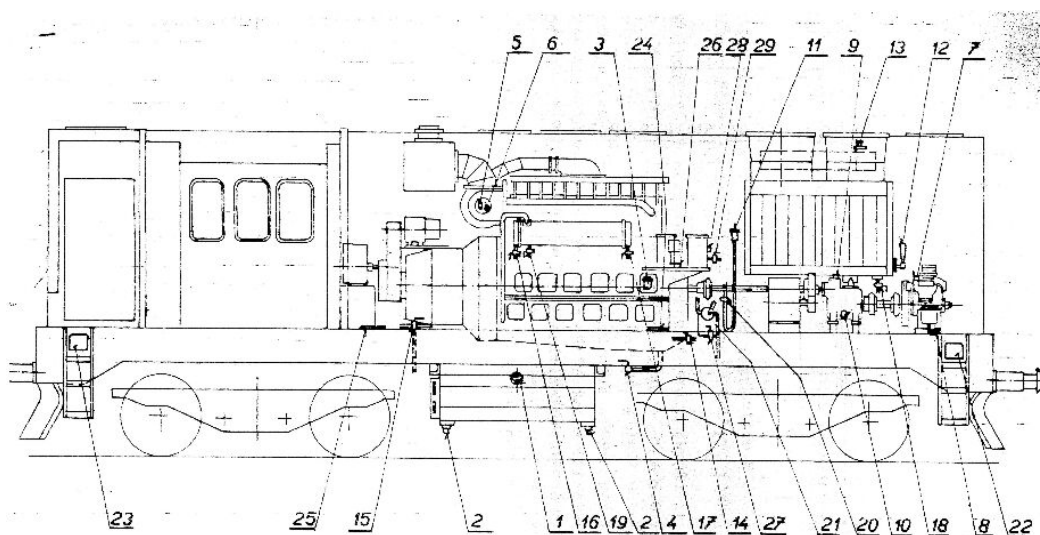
Sectional drawing of Class 742 engine and exhaust silencer
